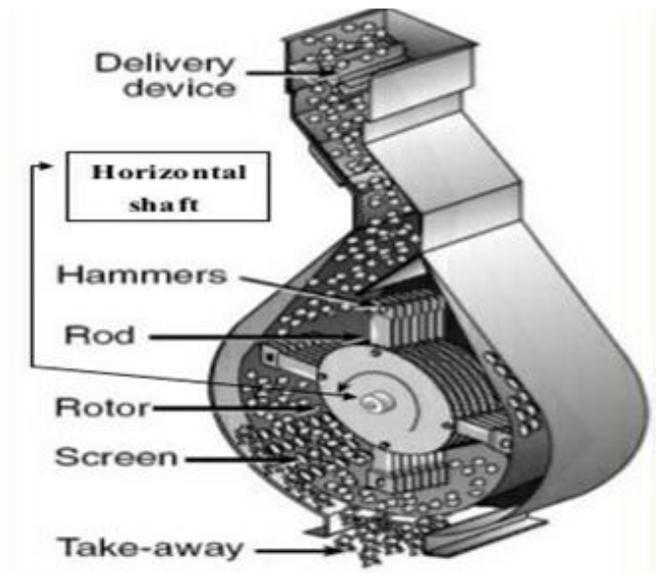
Mechanism of Horizontal Shaft Impact Crusher
